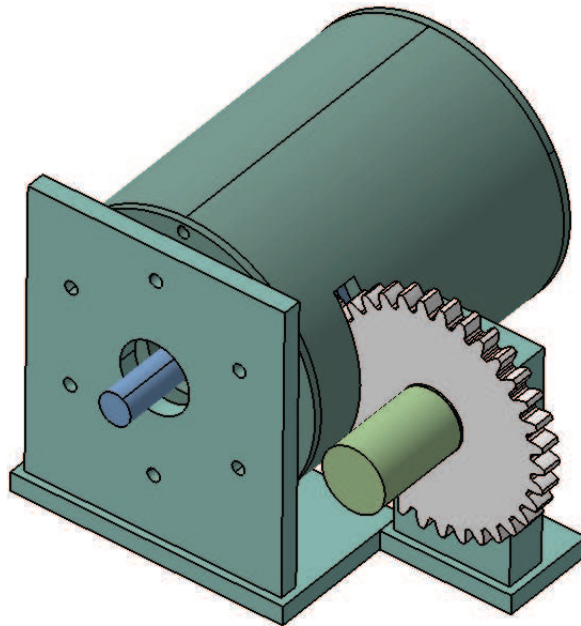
CAD drawing for inner cage rotor with both side bearings mounted.
